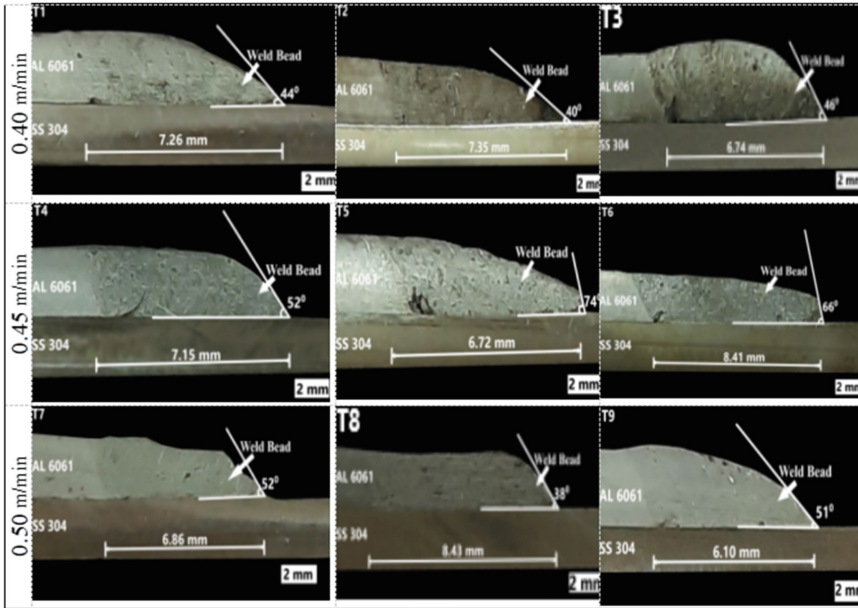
Macroscopic images of a lap joint CMT welding bead of Al 6061 and SS 304.
